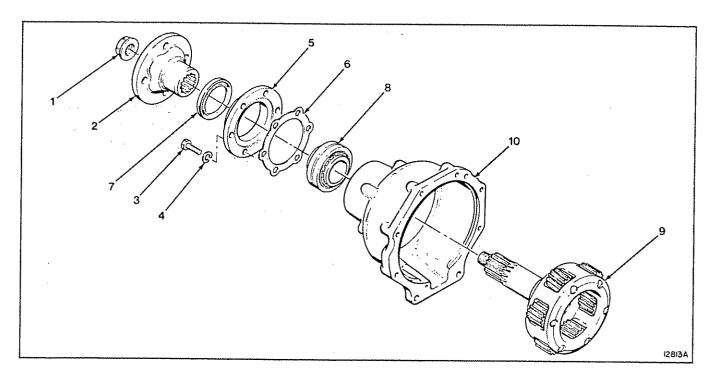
2.57:1 AND 2.91:1 Reduction Units - Early Production
